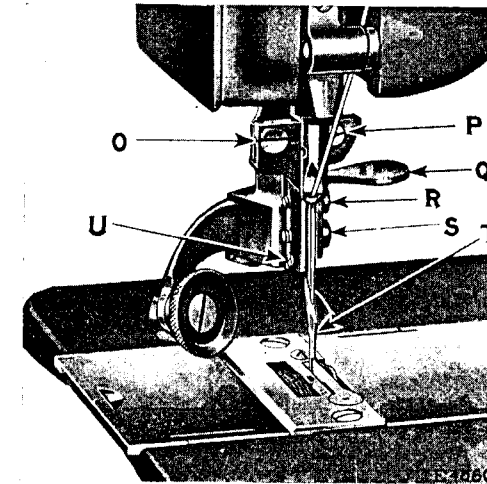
ADJUSTMENTS OF TRIMMER ON MACHINE 110 w 115
